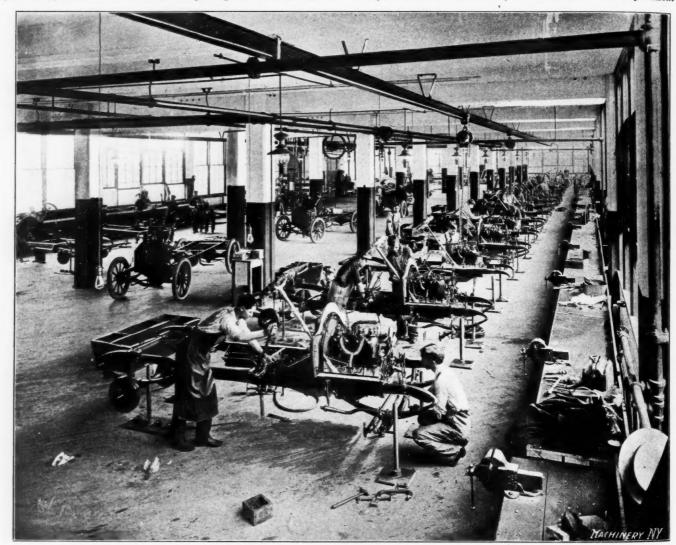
View of the Assembling Room, showing Arrangement of Overhead Track and Differential Hoists; the Trucks, each of which holds the Parts for Two Cars; and the Adjustable Frame Supports
